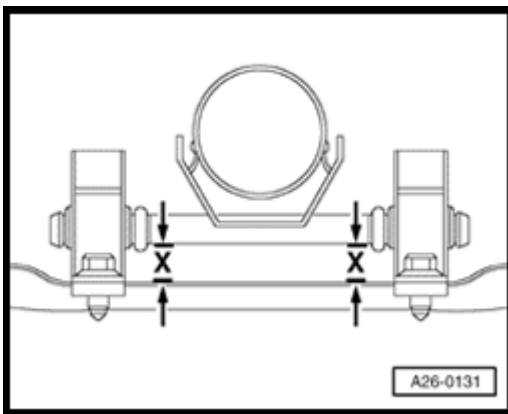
Mounting Pin On Exhaust Pipe Must Be Parallel To Tunnel Cross-Piece
